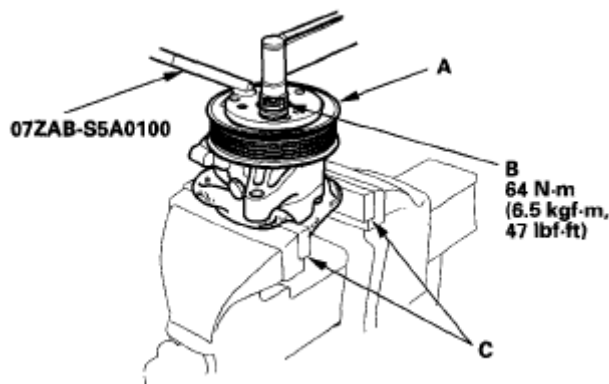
Identifying Steering Pump In Vise (With Torque Specifications)
